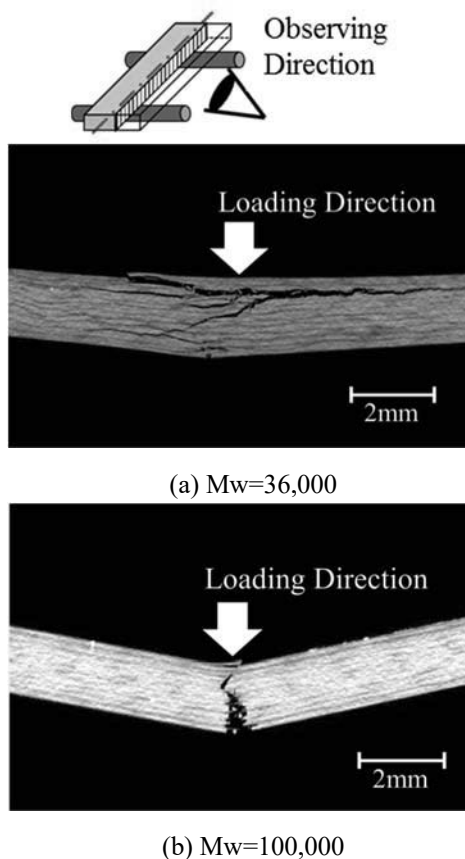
X-ray images of specimen after three-points bending fatigue test.
